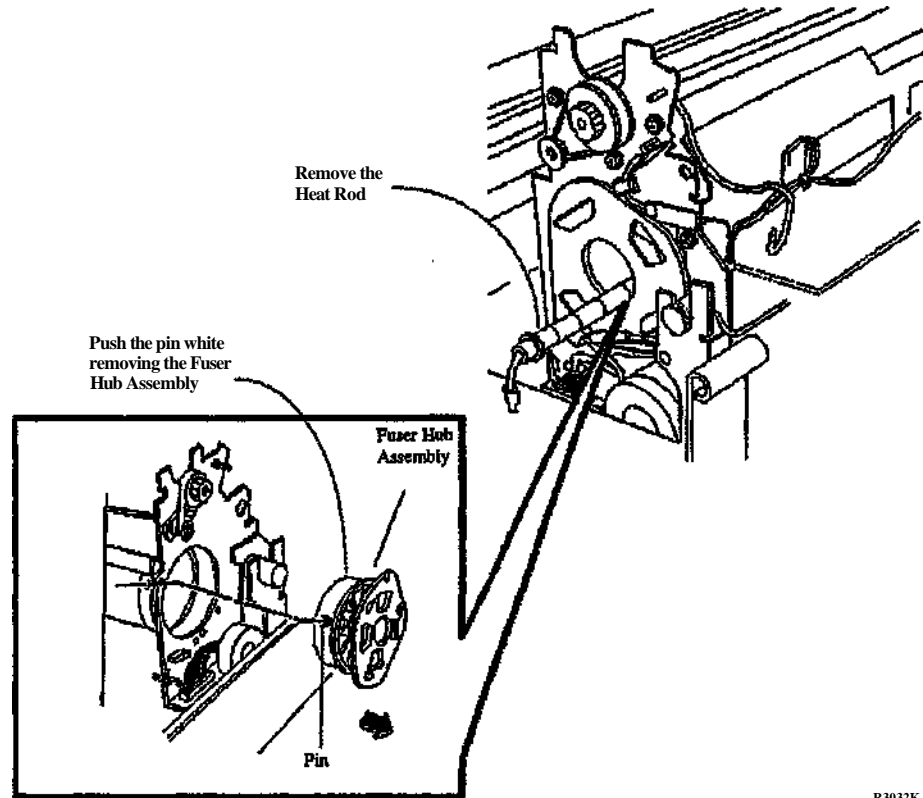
Removing the Heat Rod and Fuser Hub Assembly
